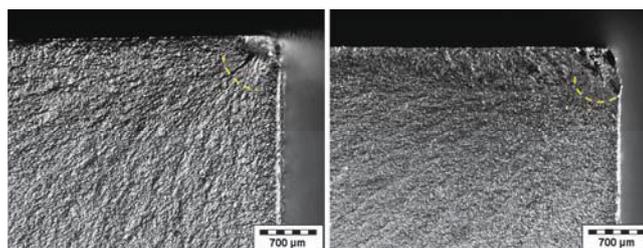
Fracture surface of machined shot peened (l) and as-forged shot peened (r) plane specimens
